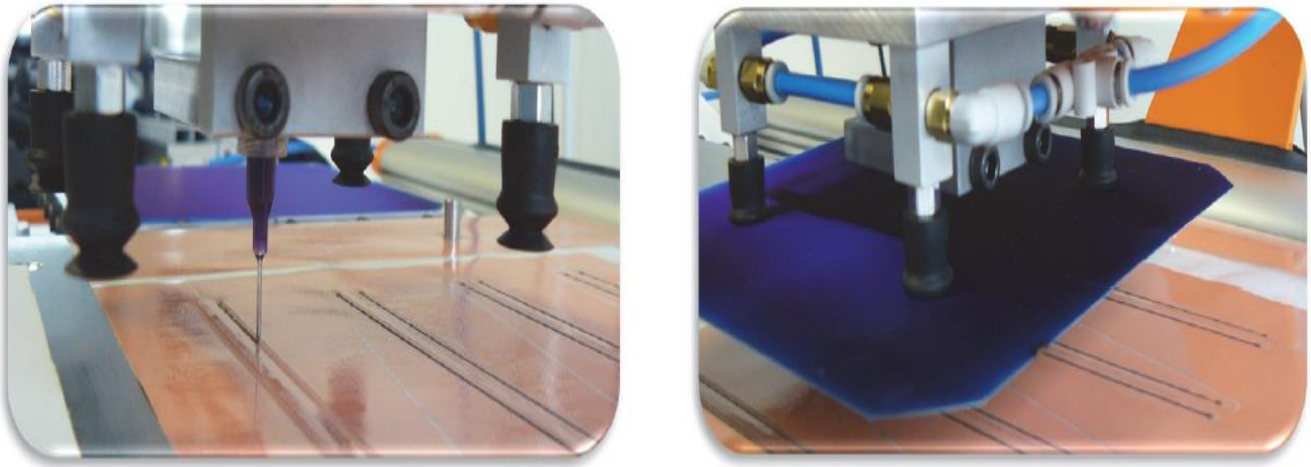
(left) Image of a solder paste's injection machine and (right) solar cell placement on the CB [38].
